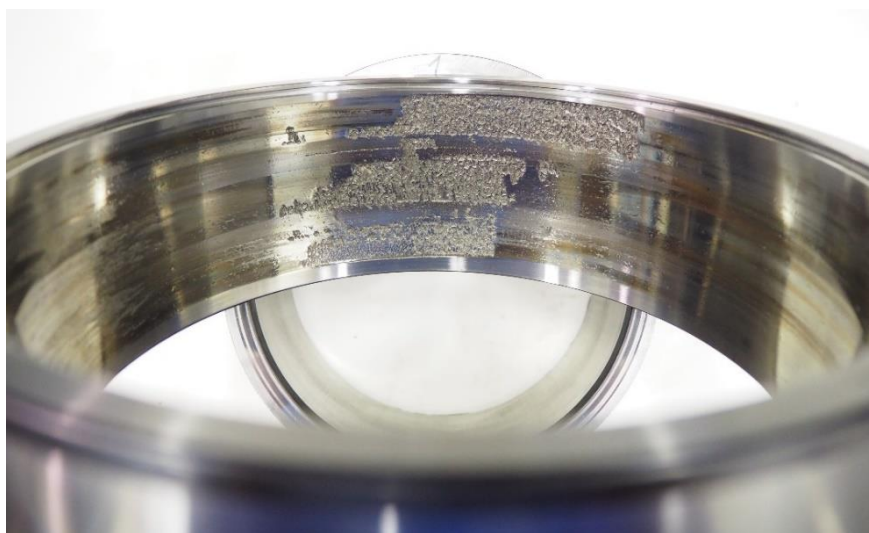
The spalling in the loading zone on the outer ring of the toroidal bearing after the test
